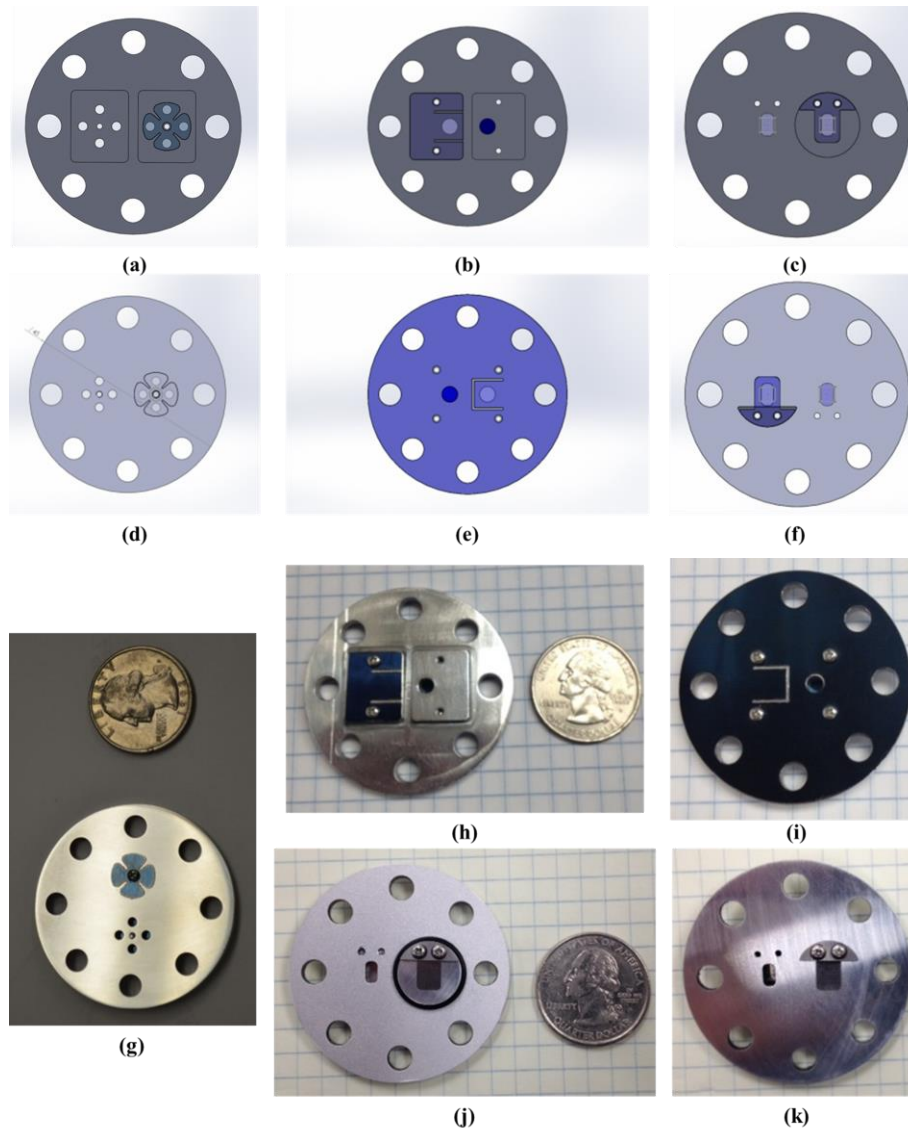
(a, g) Outlet valve and valve seat for four-leaf seat, (b,h) outlet valve and valve seat for laser-cut cantilever reed valve, (c,j) outlet valve and valve seat for chemically etched cantilever reed valve, (d) four-leaf inlet valve, (e,i) laser-cut cantilever reed inlet valve and (f,k) chemically etched cantilever reed inlet valve
